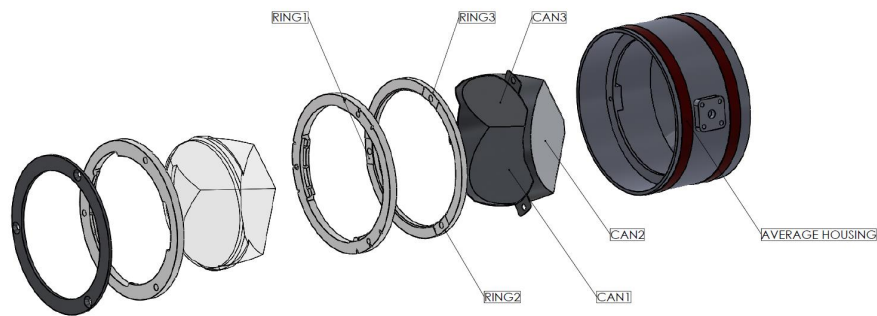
MoonLIGHT-2 assembly for the first test campaign with probes position
